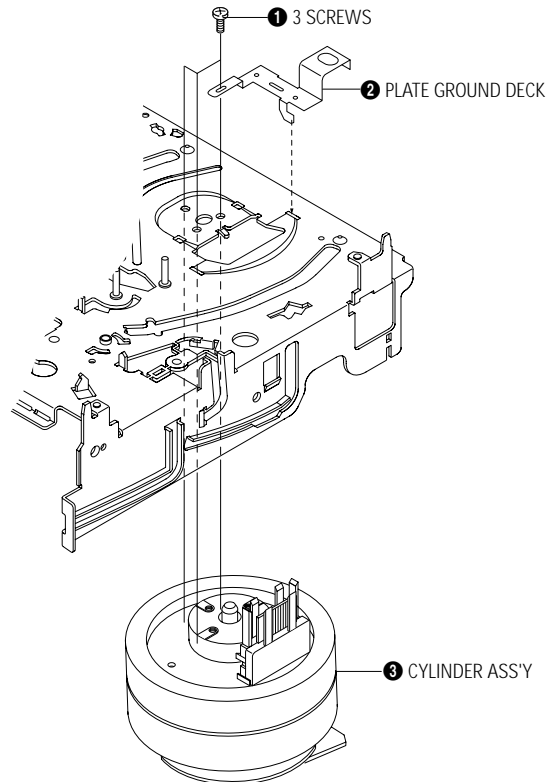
Plate Ground Deck, Cylinder Ass'y Removal
